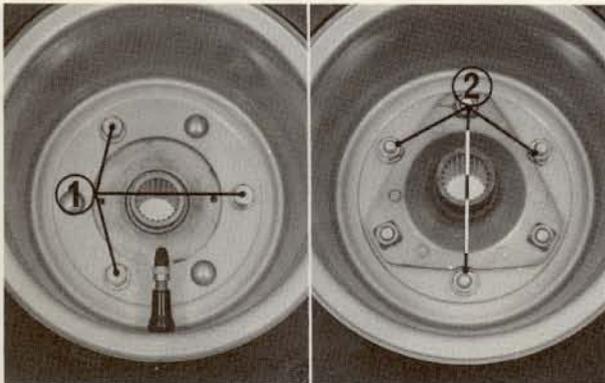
(1) Rear wheel boss bolts (2) Nuts for special bolts
